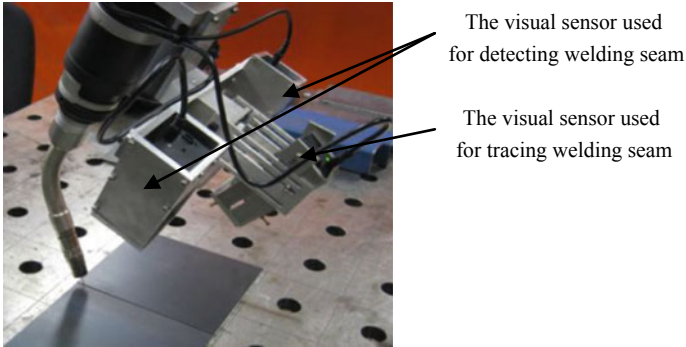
The visual sensor used in robotic welding system for MIG
